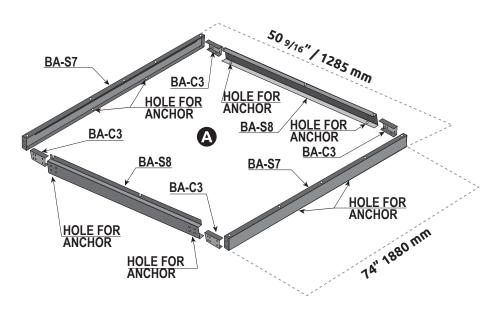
' x 8' DIRT MOUNT BASE KIT WITH L-BOLT ANCHORS FOR EARTH INSTALLATION
